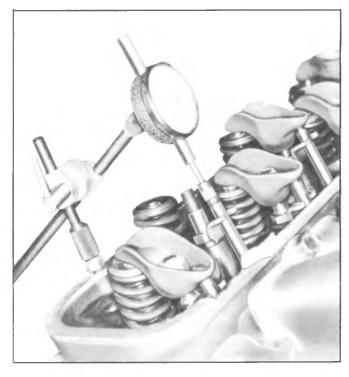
A-44V-Measuring Camshaft Lobe Lift
